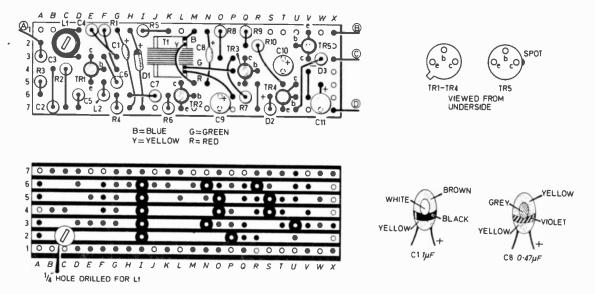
The layout of the components on the top side of the Veroboard. Vertical mounting is employed; component sizes have been reduced for clarity. Also shown is tantalum capacitor identification.
